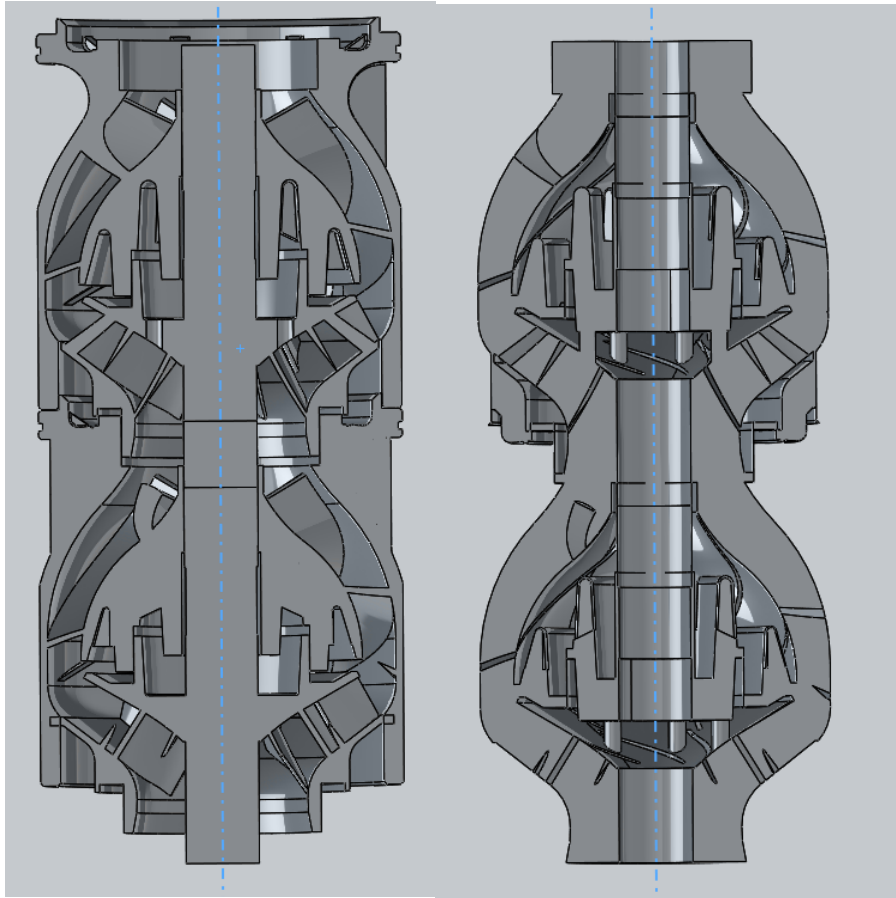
Section view of the assembled two-stage ESP with shaft (Left) and Section view of its flow path (Left)
